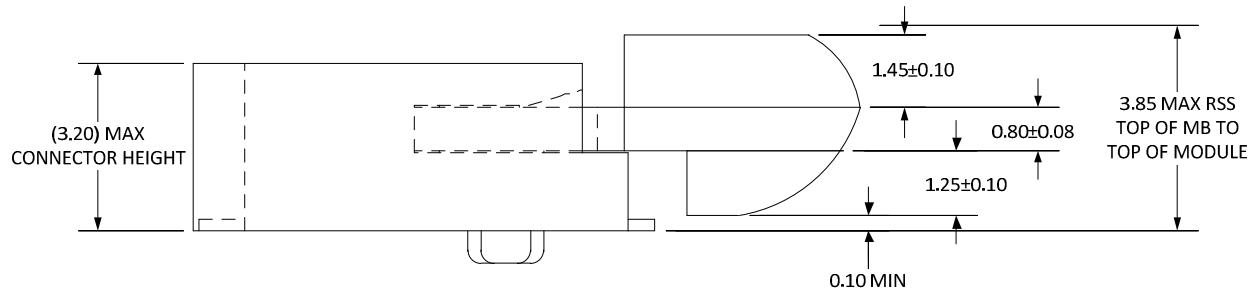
H3.2-D3 - Stack-up Top Mount Double-sided Module for 1.5 Maximum Top-side Component Height
